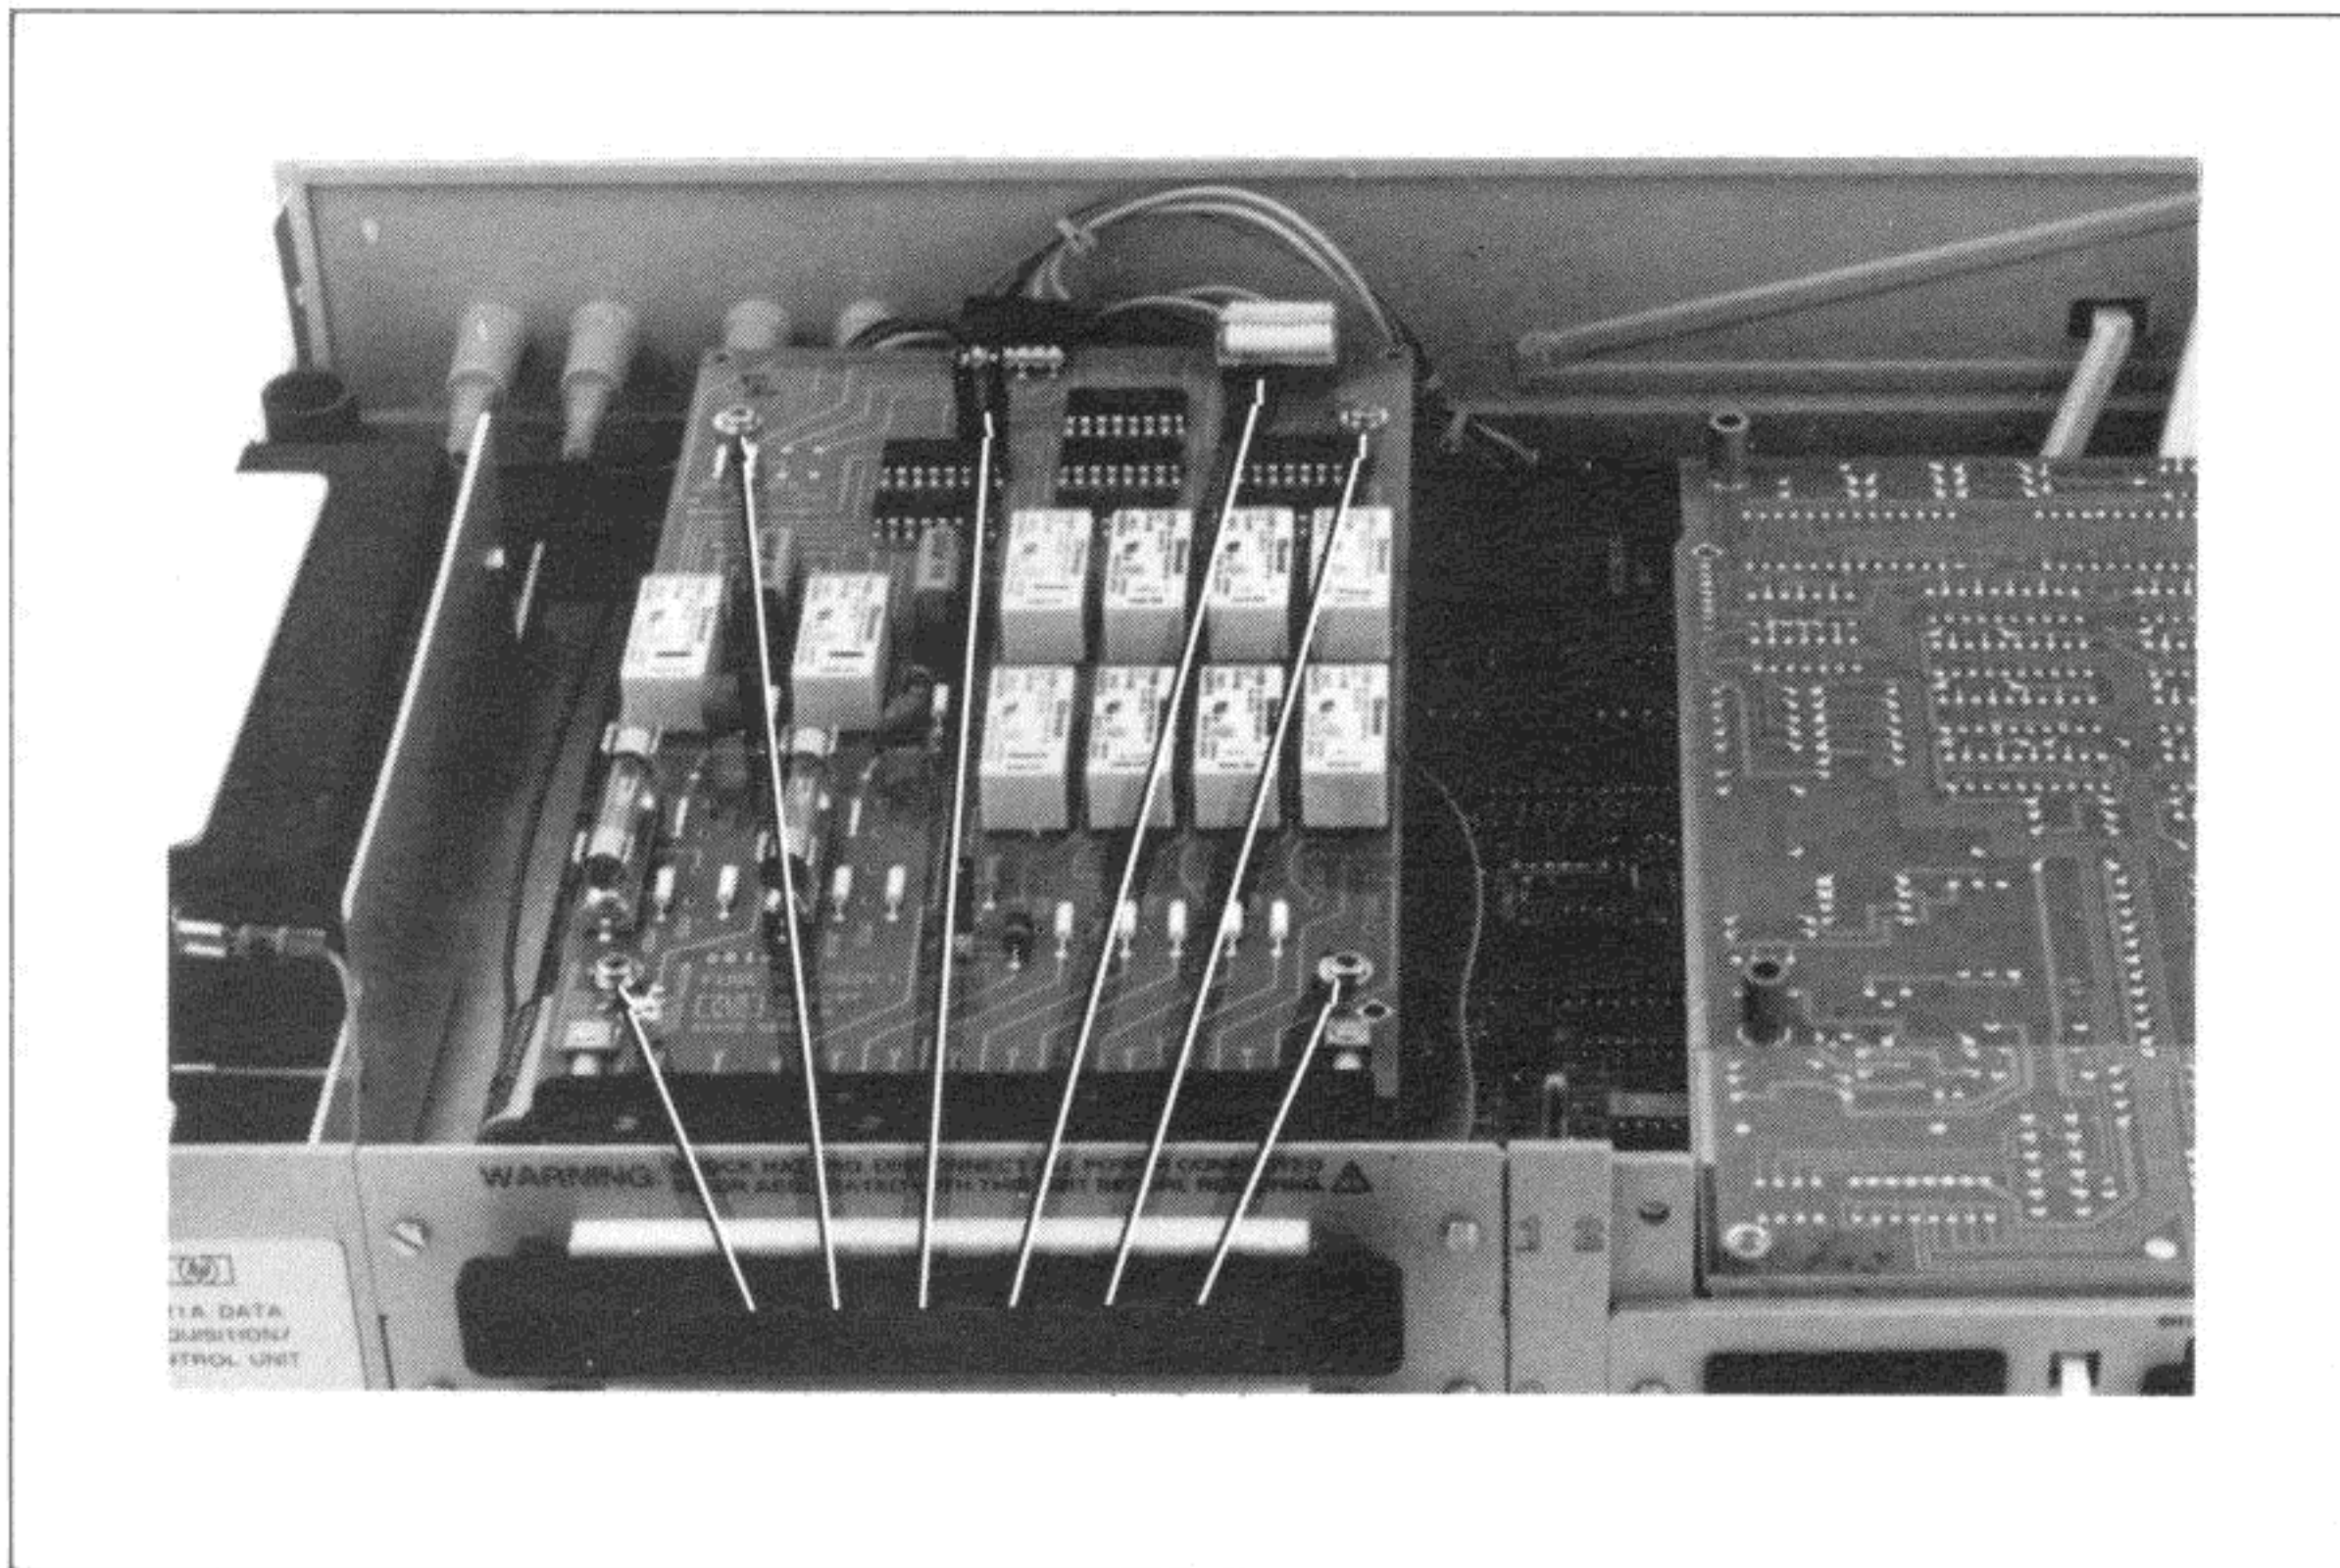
Unplug Option Cable(s) and Remove Option Screws
